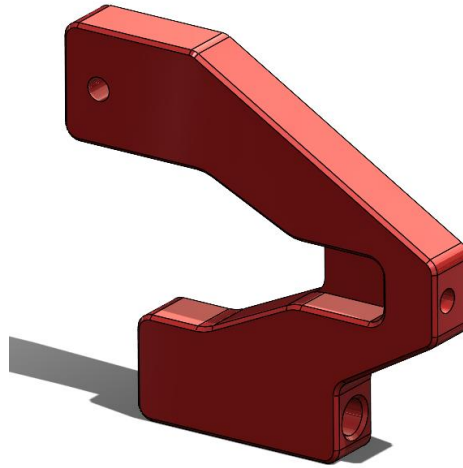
P4 VC90 CNC FRONT RIGHT BRACKET
